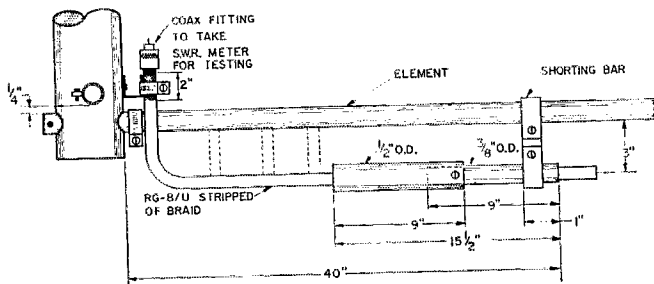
Here are the details on the gamma-matching section. As mentioned in the text, the coax fitting can be a female type, SO-239, mounted on a small bracket which is mounted on the boom. Spacing insulators for spacing the gamma line from the element can be made up from pieces of Lucite or Plexiglass.
